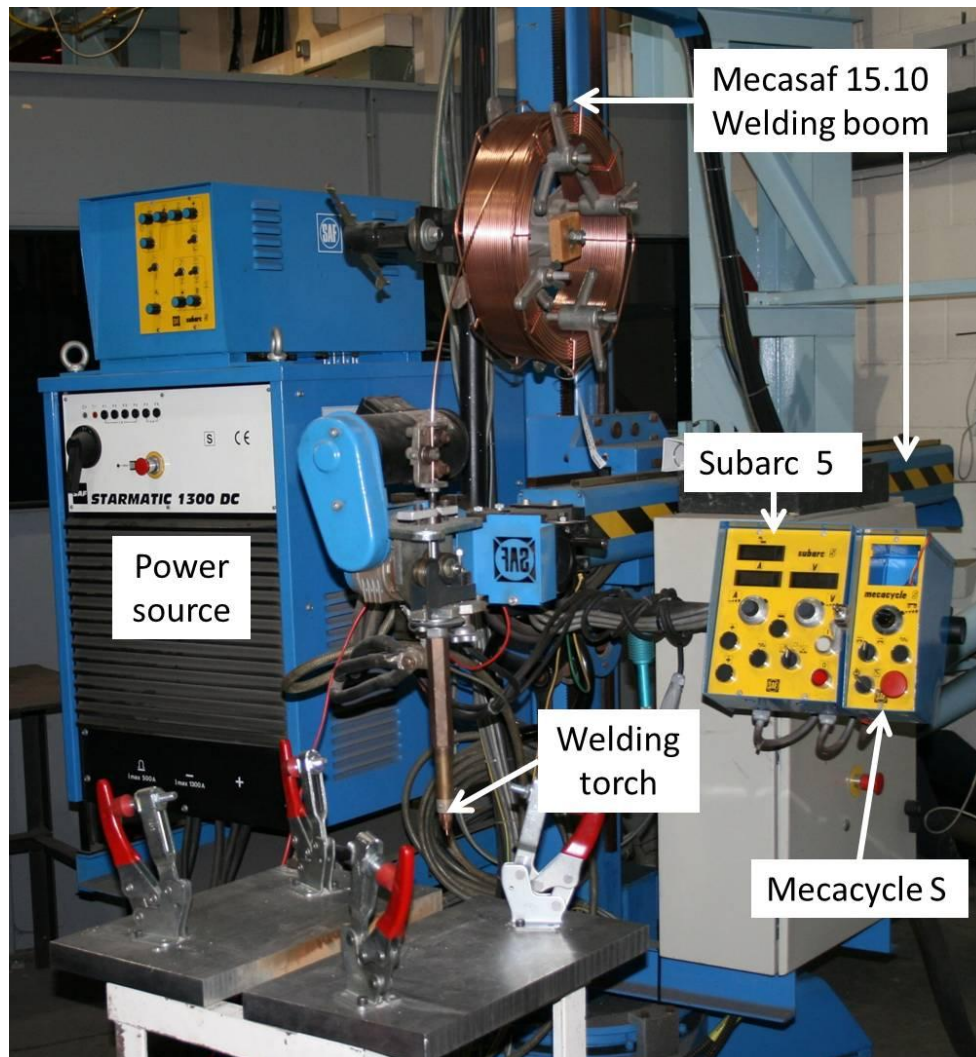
STARMATIC 1300 DC submerged arc welding machine with a Subarc 5 and Mecacycle S controllers.
